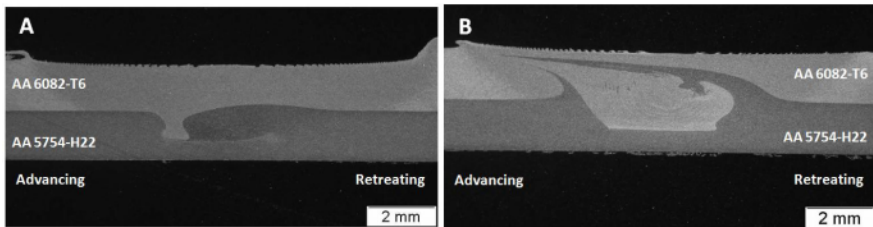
Cross-sections of AA6082-T6/AA5754-H22 dissimilar FSW lap joints performed with (A) a non-threaded - 2,5 mm long probe tool at 1500 rpm – 150 mm/min; and (B) a threaded - 2,5 mm long probe tool at 1500 rpm – 150 mm/min.
